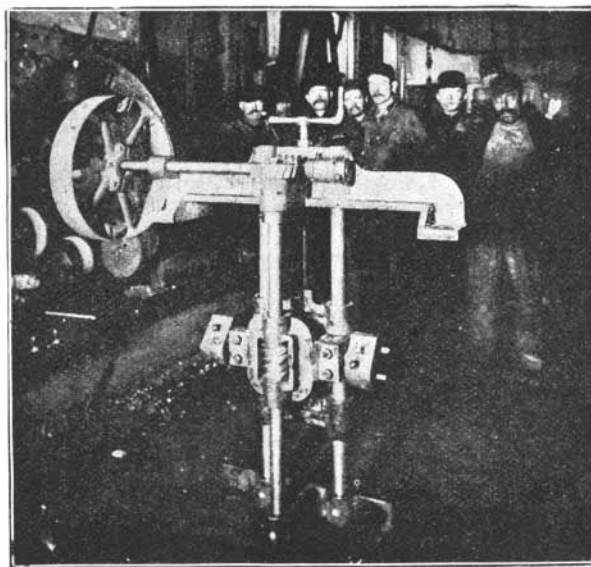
STEAMER UMBRIA—THE SPECIAL KEYWAY CUTTING MACHINE.
